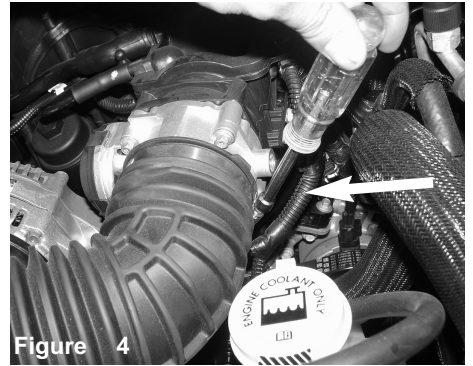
Loosen the clamp on the throttle body using 8mm nut driver.
